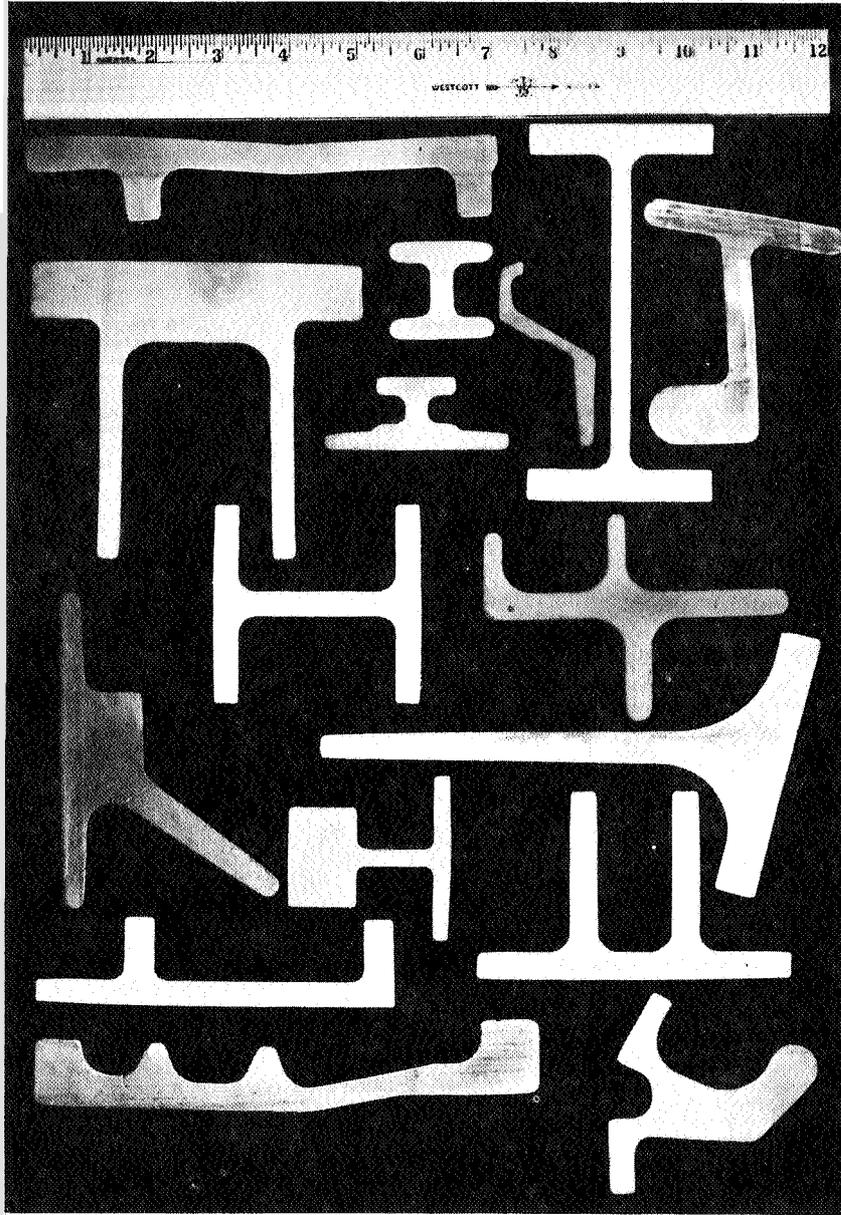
SOME TYPICAL CROSS SECTIONS THAT HAVE BEEN EXTRUDED SUCCESSFULLY FROM STAINLESS STEEL
